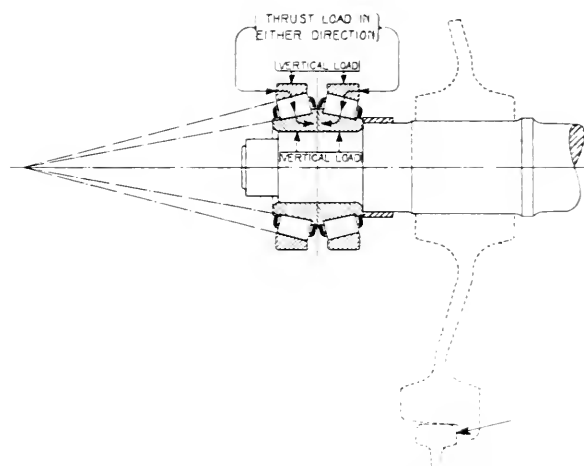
Diagram showing manner in which Timken tapered roller bearing carries vertical and thrust load and a combination of each in one bearing.
